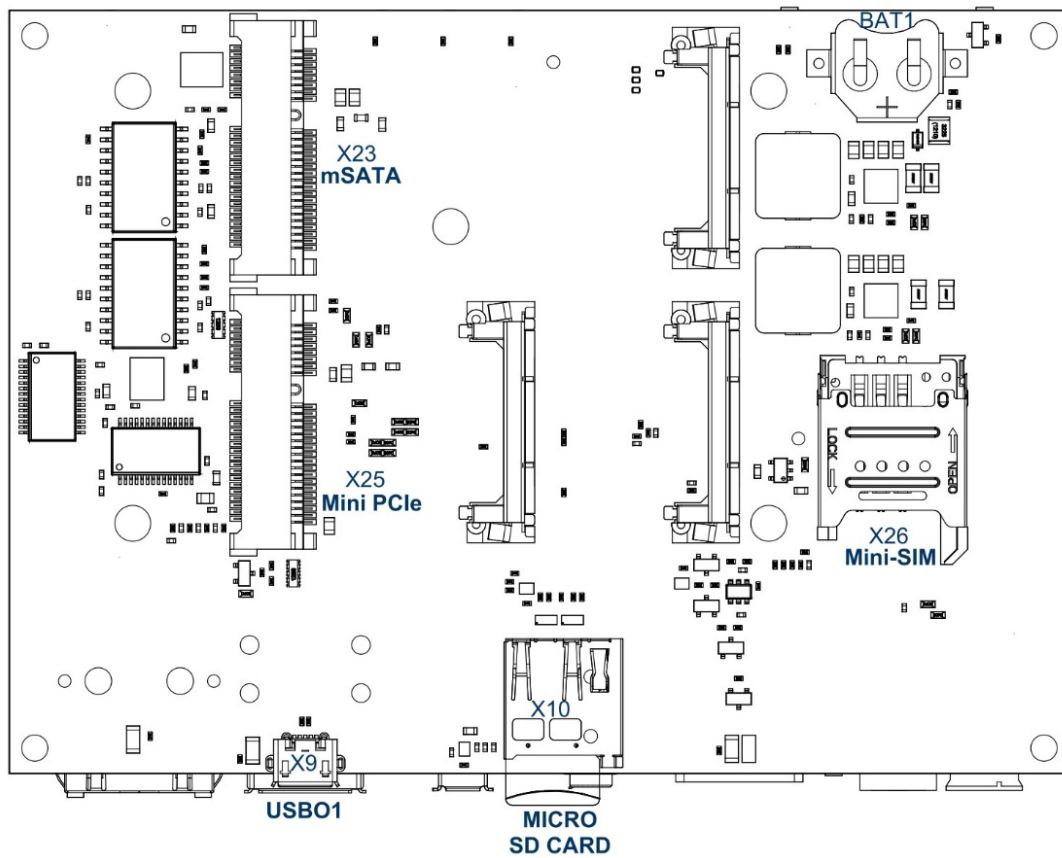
Ixora Carrier Board Connectors – Bottom Side
